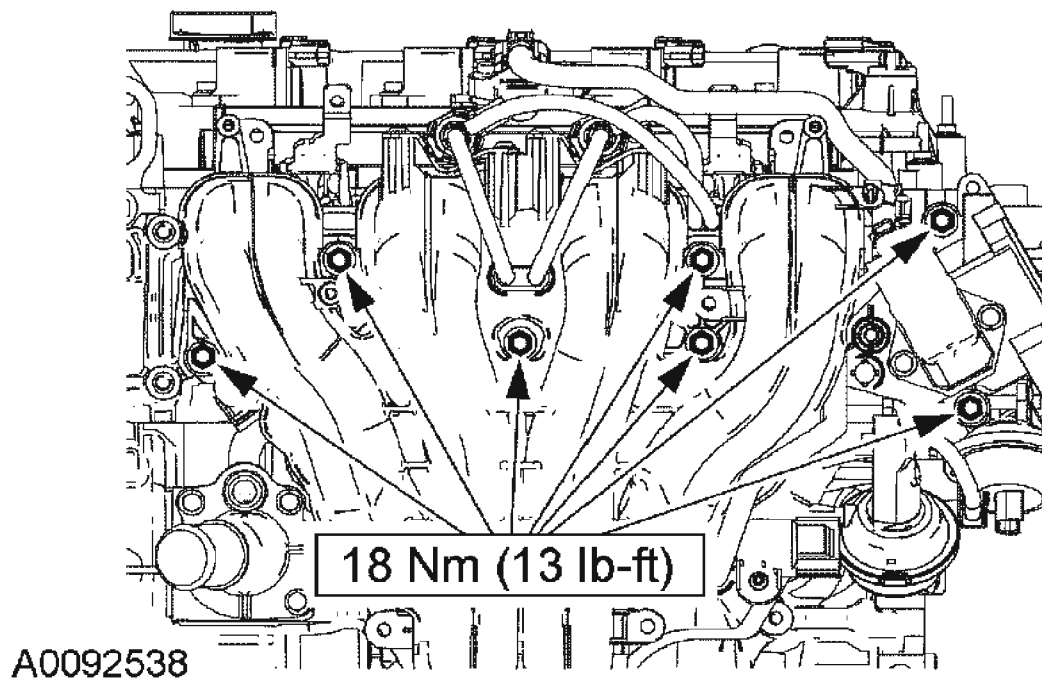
Installing Intake Manifold And Seven Mounting Bolts
